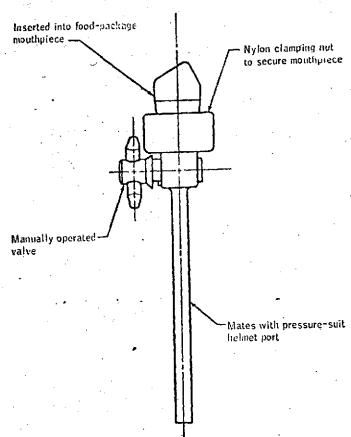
Pressure suit penetration tube with valve adapter for insertion into food package mouthpiece.
